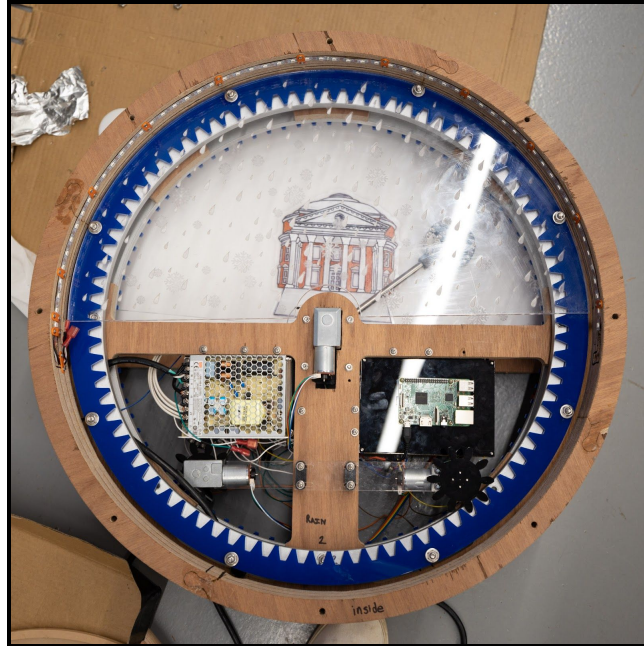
A view from the front showing the full assembly prior to gluing the front face to the front three rings
